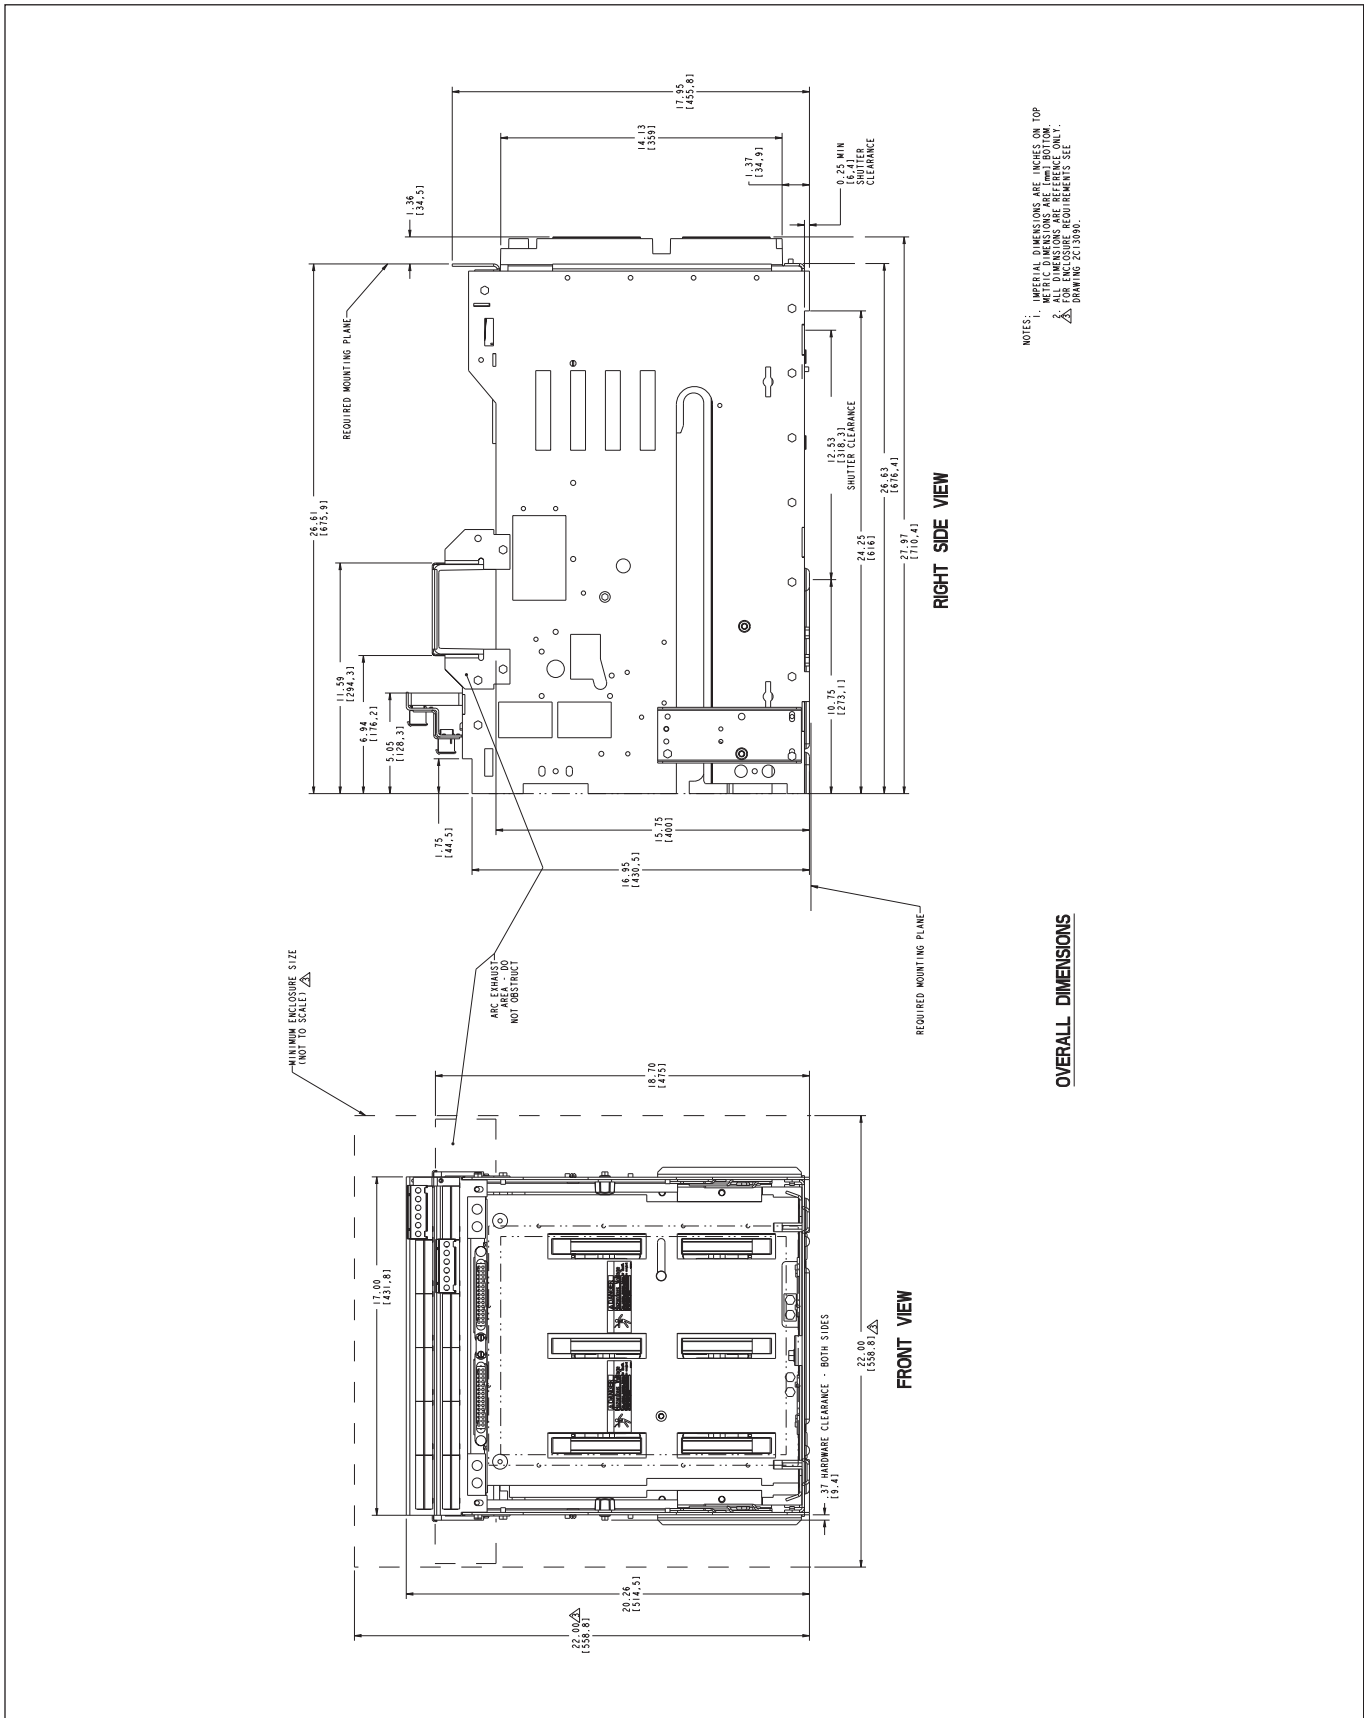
800-2000A MDSL Cassette 3-pole mounting locations dimensions
